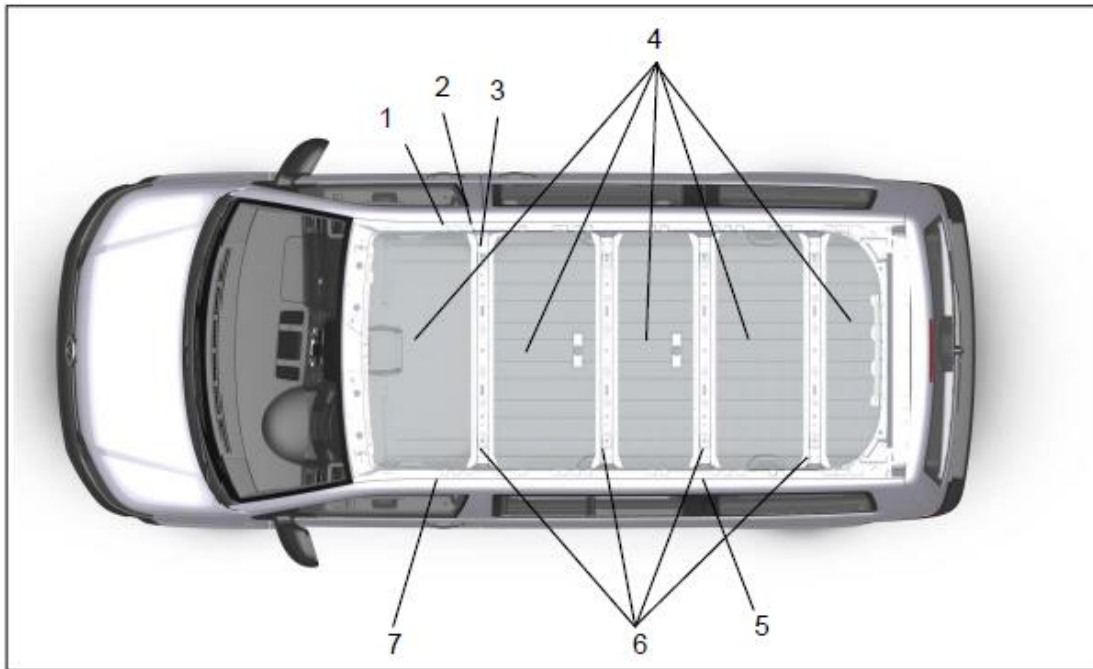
Subsequent roof cut-outs (schematic diagram)
